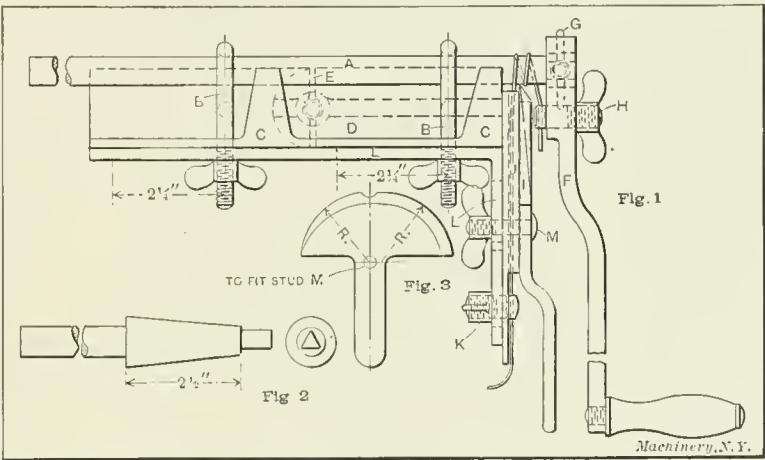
Plan View of Spring Winder. Fig. 2. Arbor used for Winding Conical Springs. Fig. 3. Spacer used for Winding Conical Springs
